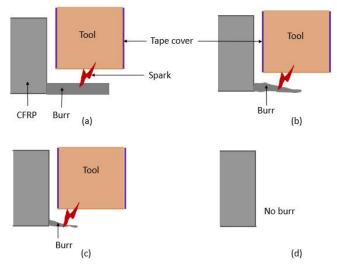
Schematic of the de burring procedure for drilled hole using EDM
